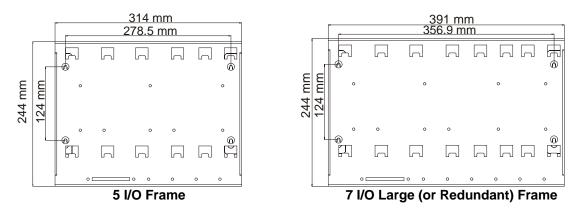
5 I/O and 7 I/O Frame Installation Dimensions and Screw Holes for Installation
